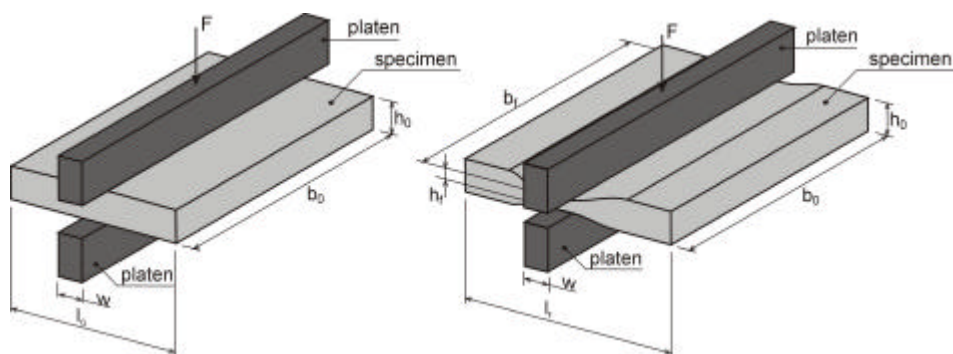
Principle of the psc-test. An instantaneous rectangular specimen (left) is compressed between two platen and deforms due to the platen normal force (right).
